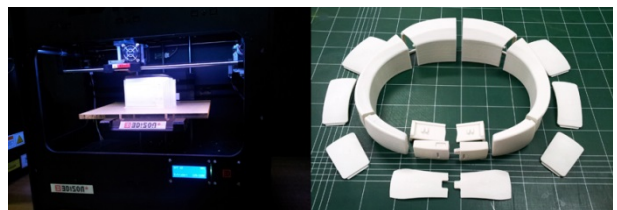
Rapid Prototyping (Left: 3D printer, Right: printed parts)
